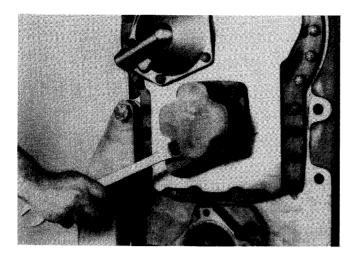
Remove idler shaft rear bearing cap bolts and washers.
